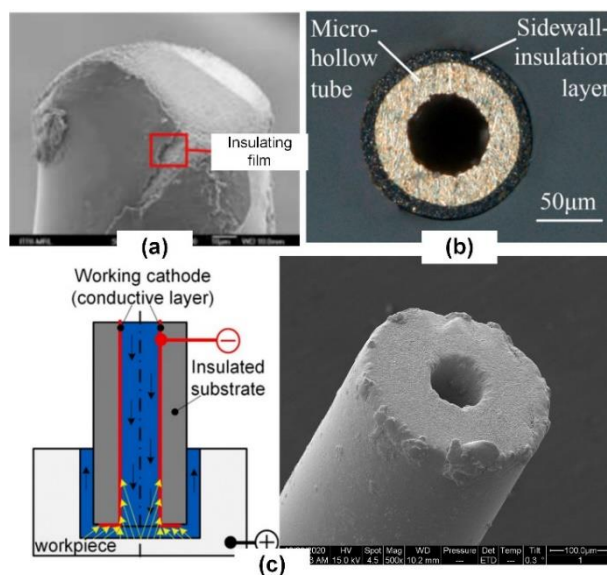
Micro-tools with dual functions of accelerating electrolyte flow and suppressing stray corrosion: (a) Sol-gel coated spiral drill (Hung et al., 2013); (b) Sidewall-insulated tube tool (Kong et al., 2021); (c) Silver-plated glass tube tool (Liu et al., 2021a).
